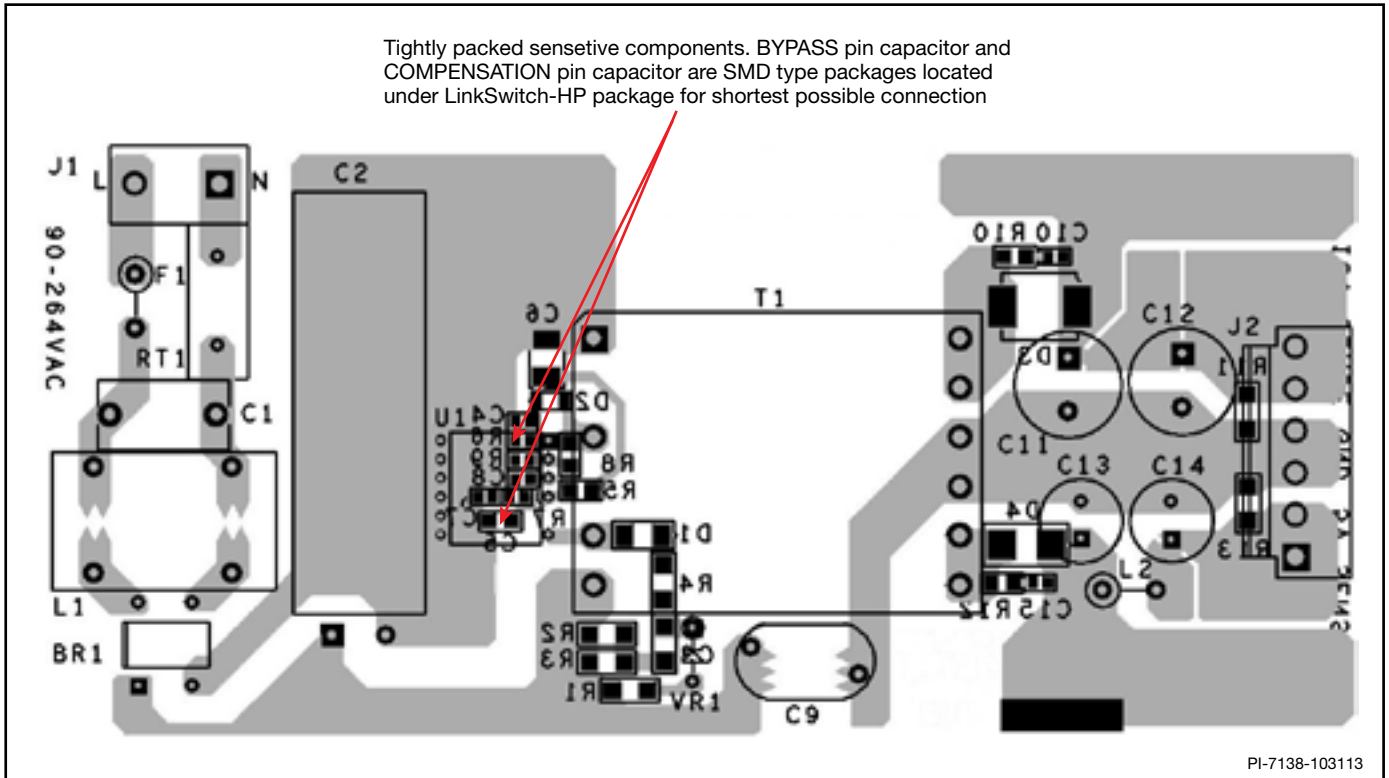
Layout Example of a Dual Output 17 W Open Frame Design Using eDIP Package, see Figure 48 for Schematic.
